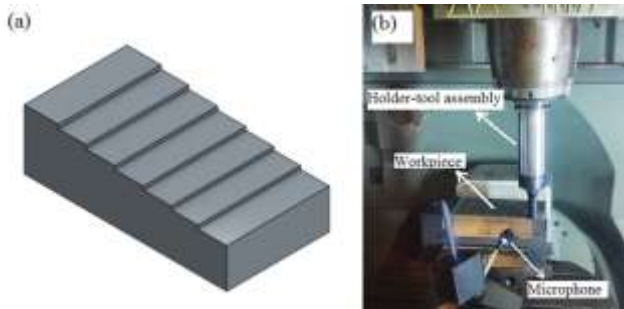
Cutting experiments. (a) designed workpiece, (b) experiment setup
